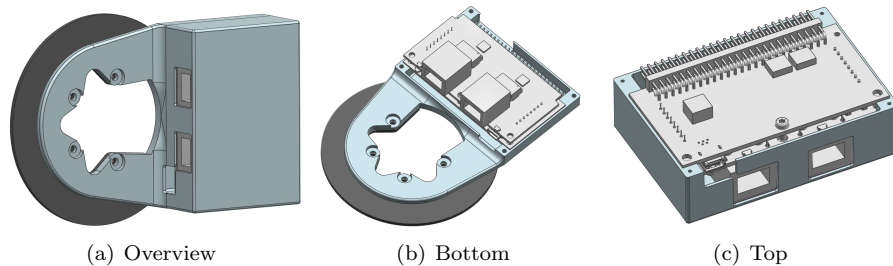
Controller Case with ports for header pins, EtherCAT and micro USB
